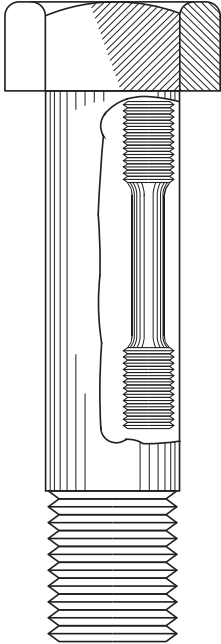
Location of Standard Round 50-mm (2-in.) Gauge Length Tension Test Specimen When Turned from Large Size Bolt
